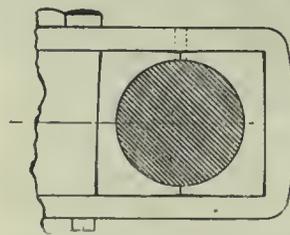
PROPER METHOD OF FINISHING THE BRASSES OF A CRANK-PIN BEARING TO PROVIDE FOR NECESSARY EXPANSION IN SERVICE.
